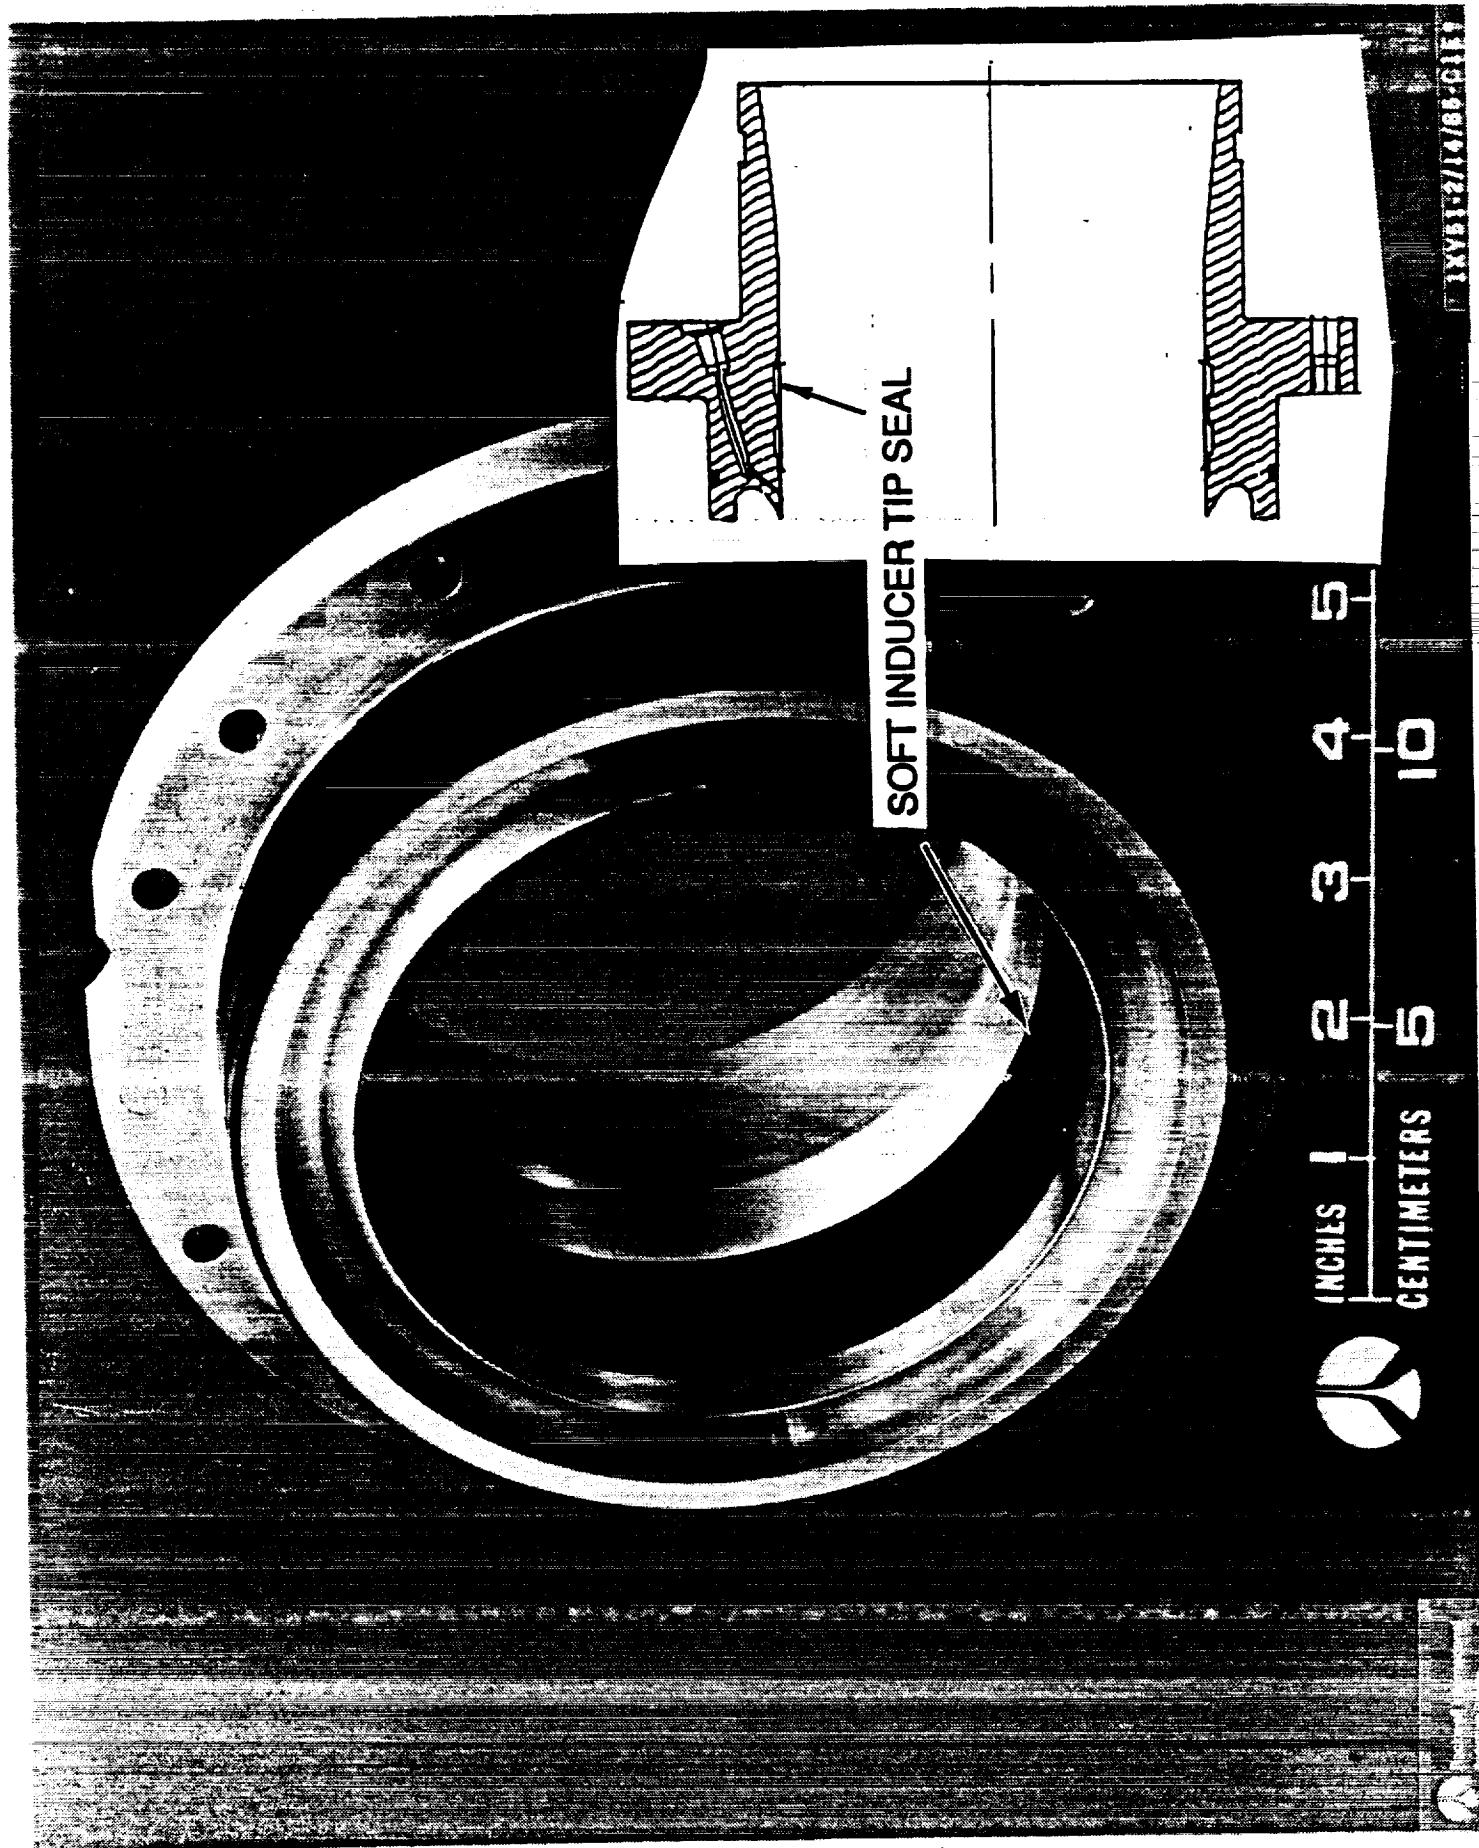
Crossover Tester Inlet Housing with Soft Inducer Tip Seal
